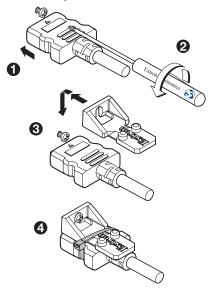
Top Mounting a LockIt Cable Lacing Bracket
